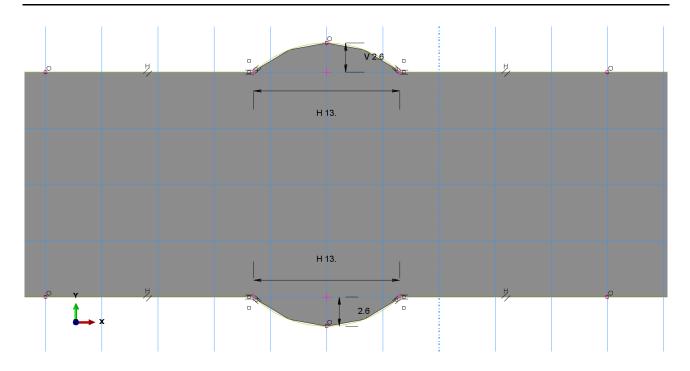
Quality level "B" double-vee joint. Weld imperfections in the Abaqus model. (all measures are in millimeters)
